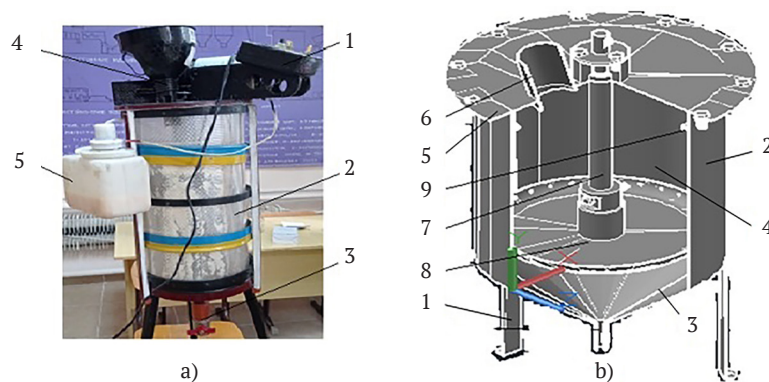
General view of the mixer a): 1 – control panel, 2 – cylindrical working chamber, 3 – nozzle for discharging the paste, 4 – flour vibratory dispenser, 5 – dispenser of liquid components; 3D model b): 1 – body, 2 – cylindrical and 3 – conical parts of the working chamber, 4, 5 – lid with an inlet 6 for flour dispensers, 7 – drive shaft with plate discs, 8, 9 – jet sprayers
